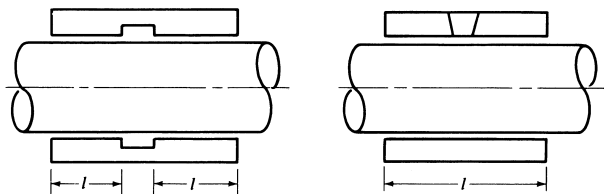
Length, l , of bearing for circular groove type (left) and single inlet hole type (right).
